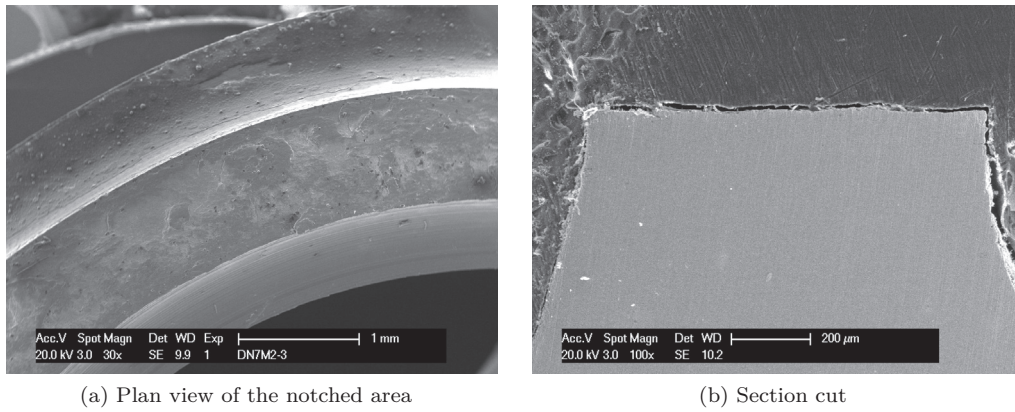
SEM micrographs of fracture surface for specimen DN7M2\_3
